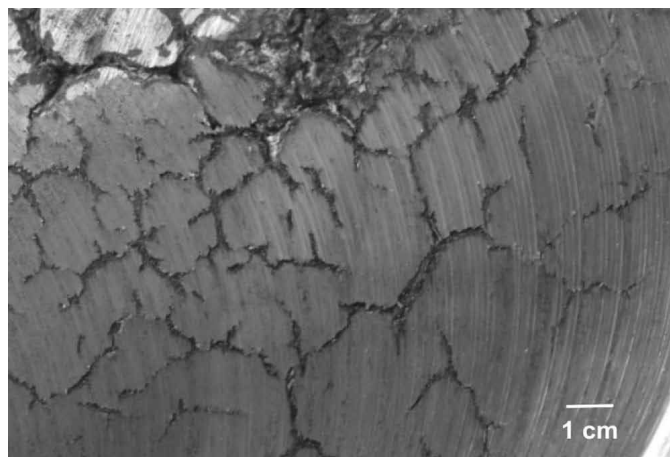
A fragment of the surface of the ladle bottom with a network of cracks revealed after machining and levelling of the ladle working surface
